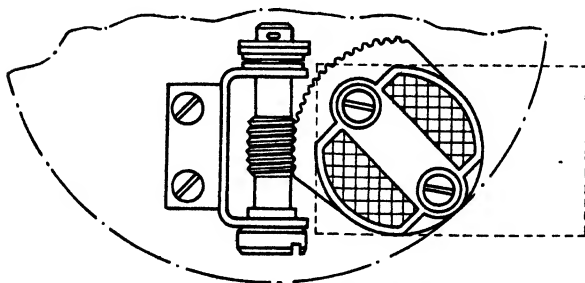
Brake-magnet adjustment in Measurement single-phase meter.
